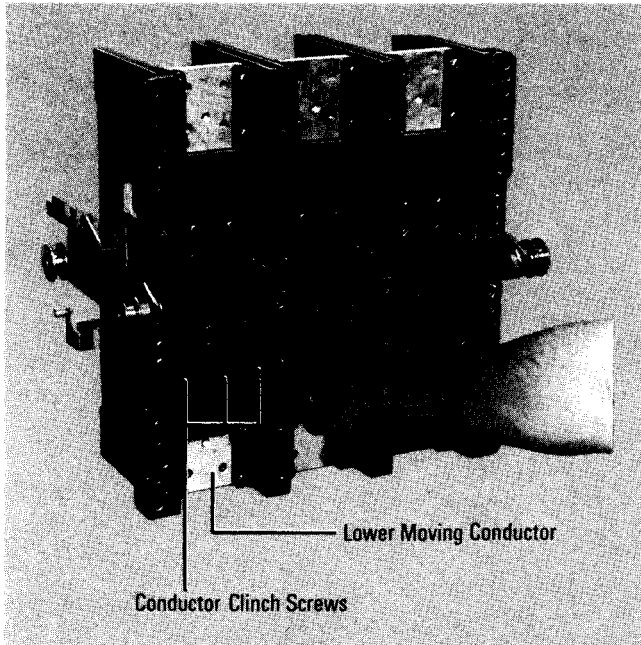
Removing Lower Moving Conductor Clinch Screws From a 1600 Amp Breaker.
